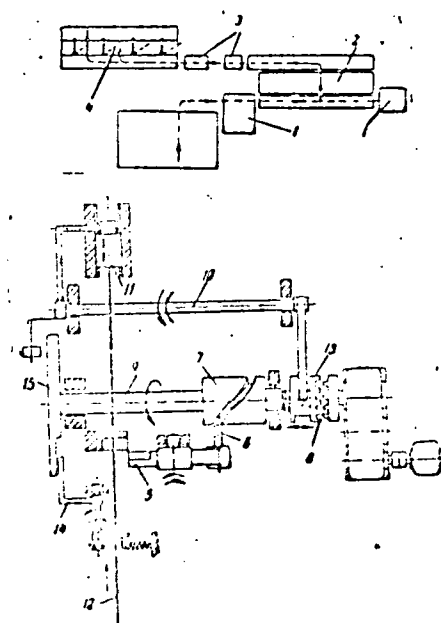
1 - assembly for adjusting and cutting; 2 - assembly for dismounting and transporting; 3 - defectoscopic assembly; 4 - assembly for sorting the usable and the defective products; 5 - movable blade; 6 - knife finger; 7 - knuckled drum; 8 - clutch; 9 - roller; 10 - lever; 11 - movable carriage; 12 - rod; 13 - semiclutch; 14 - lever; 15 - sprocket
